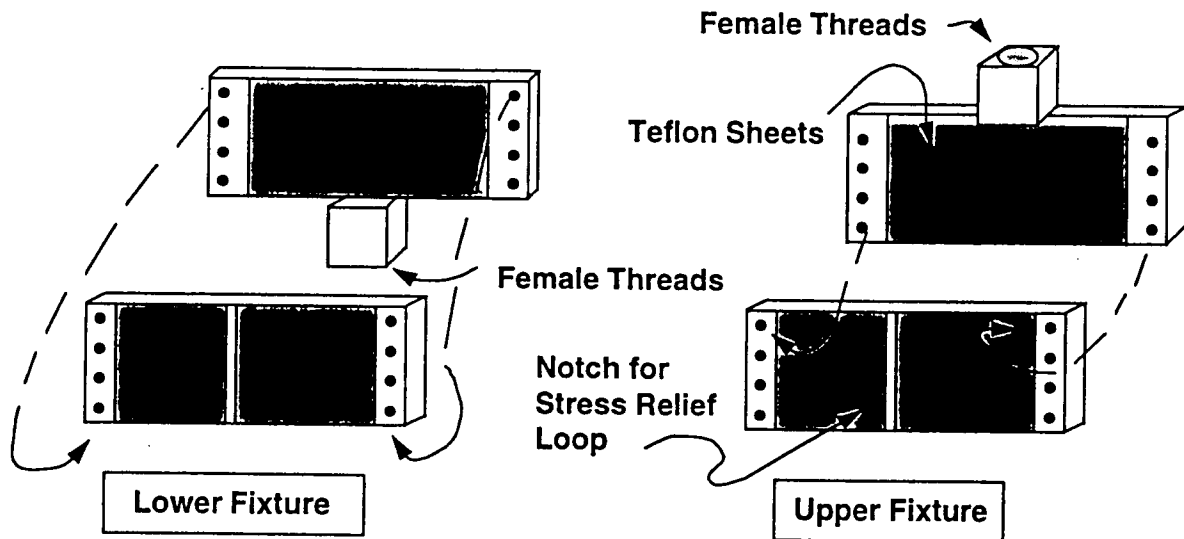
Schematics exhibiting design of mechanical fatigue testing fixtures.
